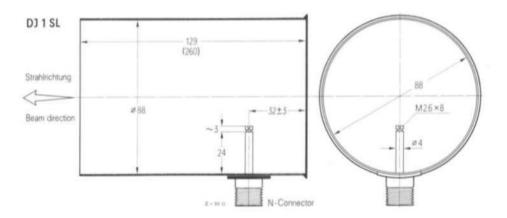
Dimensions of a tubular radiator for the 13 cm band
